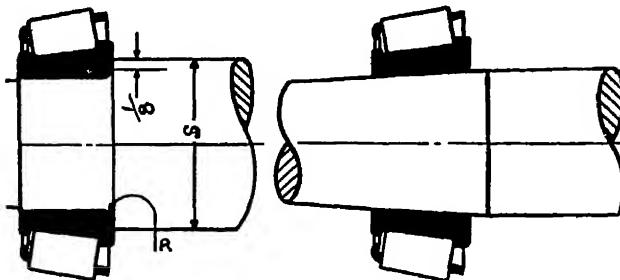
ILLUSTRATING MACHINING DIMENSIONS OF PARTS FOR TAKING TIMKEN BEARINGS
